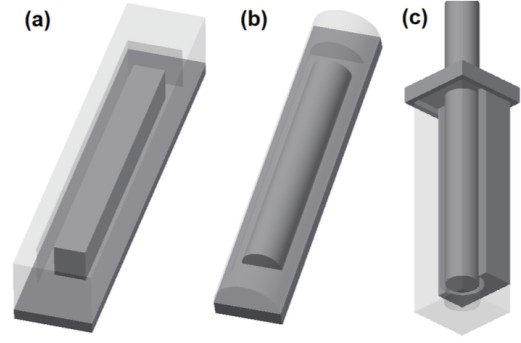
3D printed mold designs in Inventor. (a) Rectangular, (b) semi-circular, and (c) circular molds.
